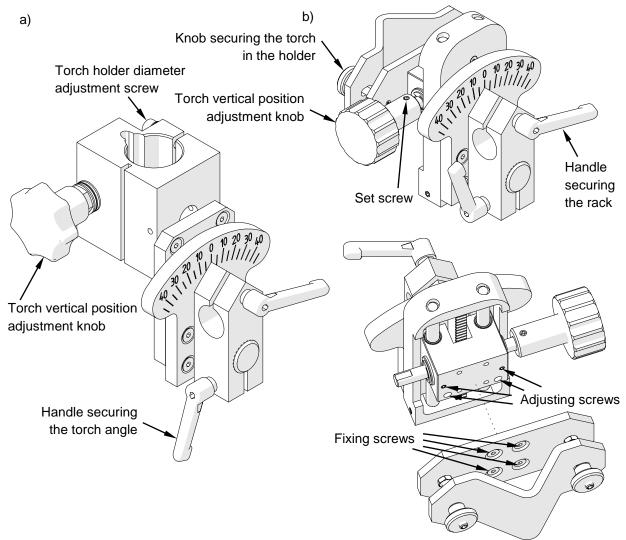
Design of the precise machine torch holder for oxy-fuel cutting (a) and of the precise torch holder for plasma cutting (b)
